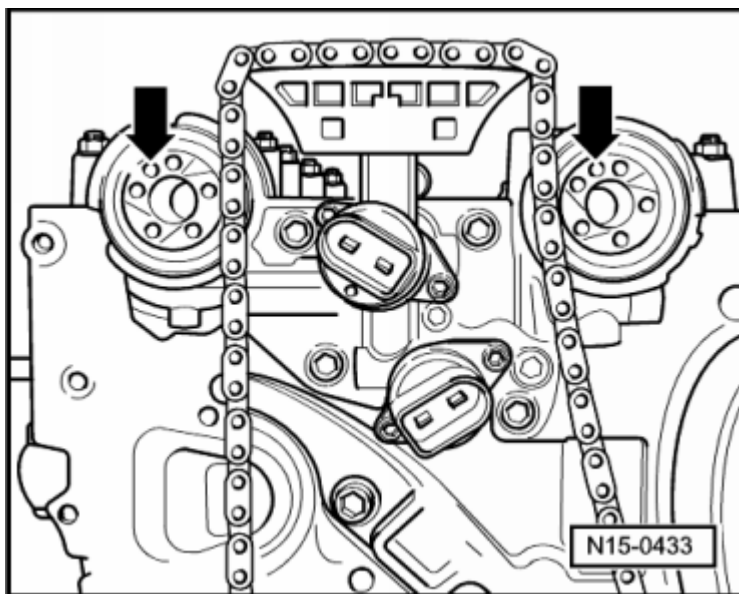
Camshaft Timing Adjusters Positioned On Camshaft Mountings
